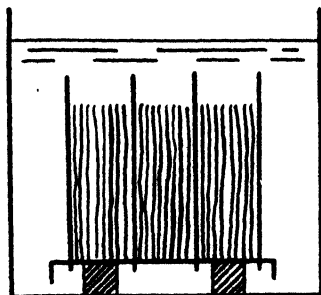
Loaded rack in pickle tank. Skeleton diagram, cross section.
